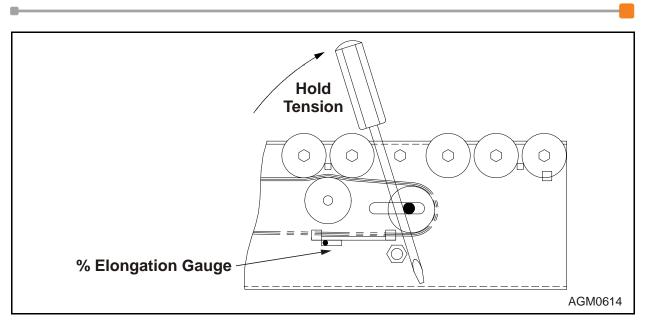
31 Carrier Roller Flat Belt Drive Adjustment
